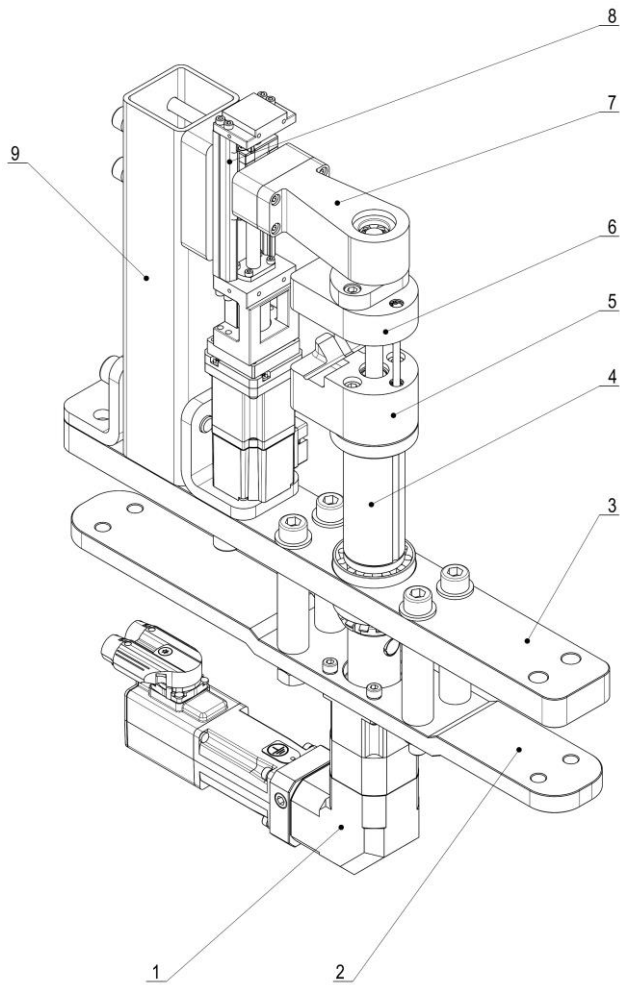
Fixed gripper assembly: 1 – rotational movement drive system, 2 – drive system mounting plate, 3 – gripper system mounting plate, 4 – rotating bushing, 5 – lower jaw, 6 – sliding top jaw, 7 – yoke of the top jaw, 8 – translational closing movement drive system, 9 – auxiliary frame
